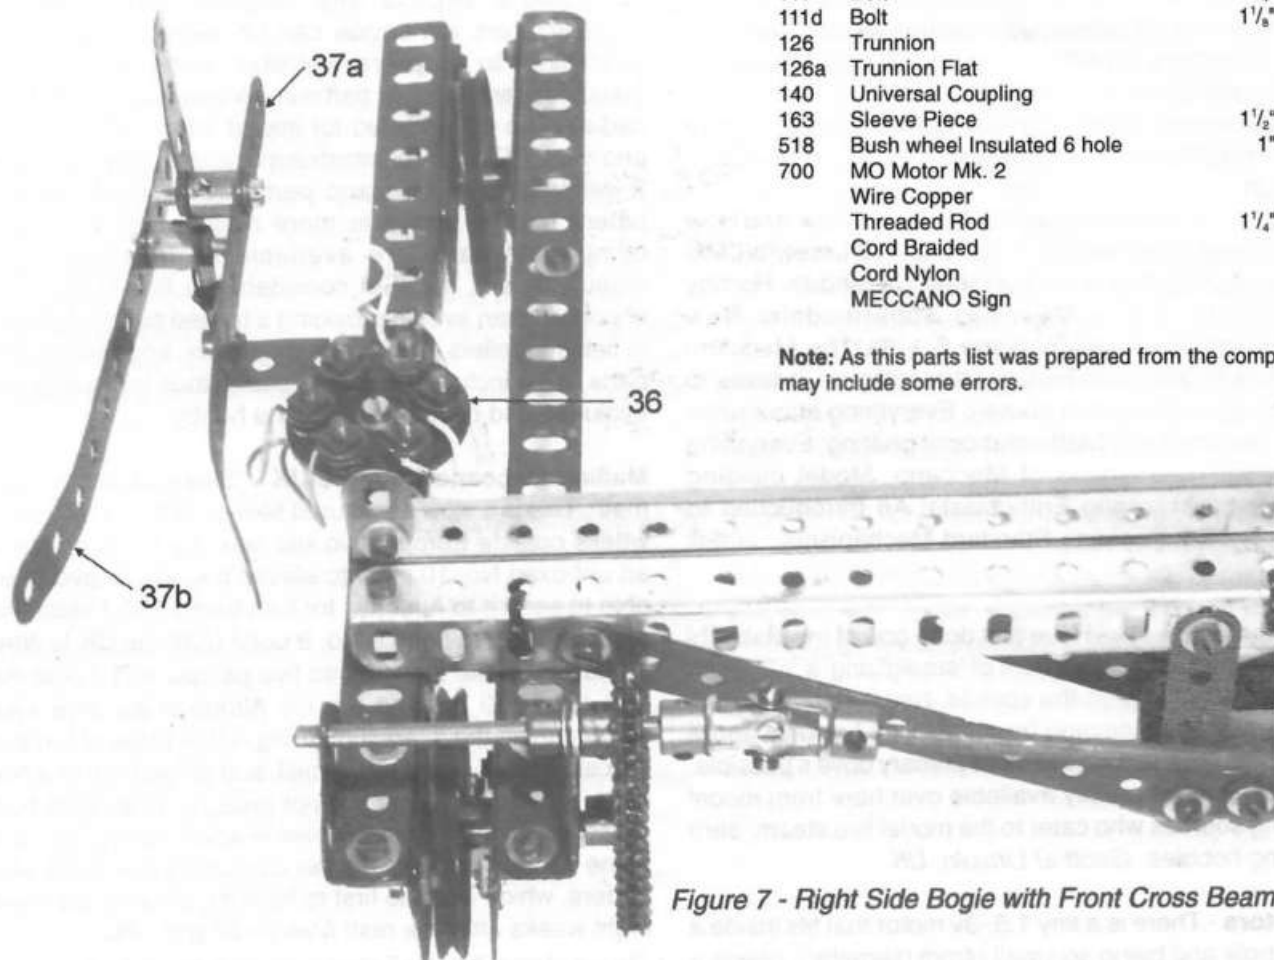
Right Side Bogie with Front Cross Beam Removed
